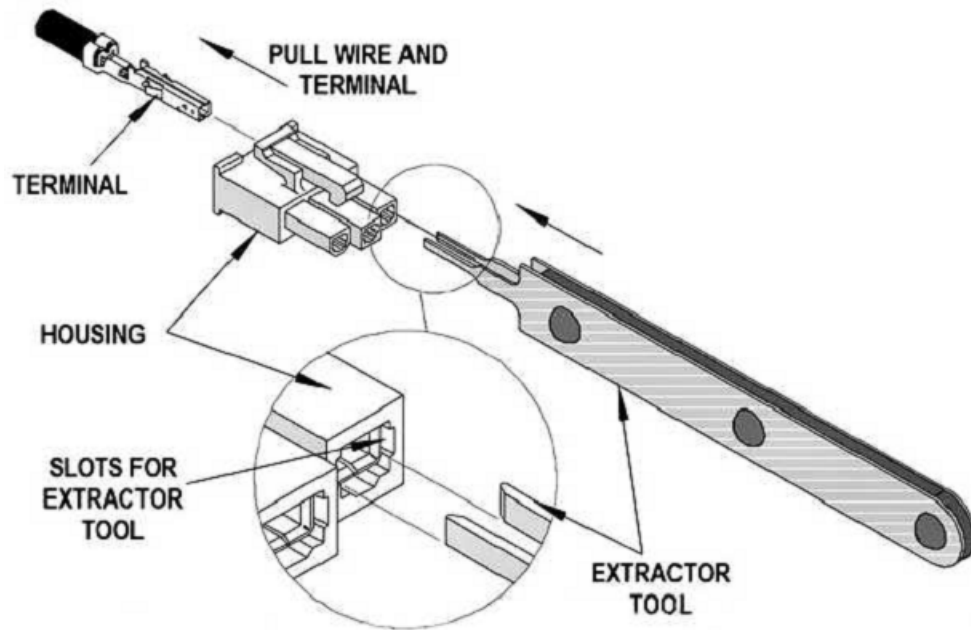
Using Extractor Tool to Remove Wire and Terminal from Connector
